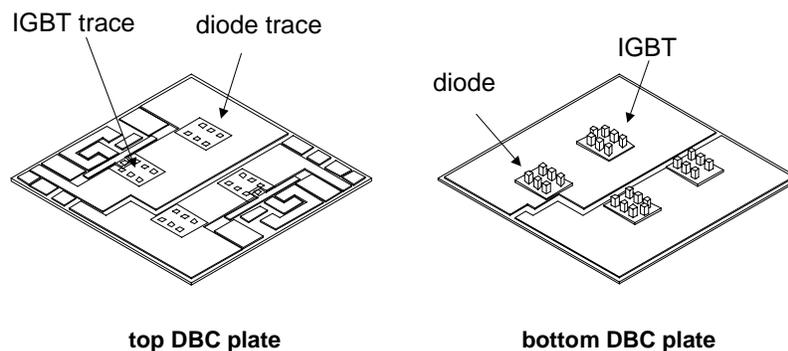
Top and bottom plates of a three-dimensional power module structure
